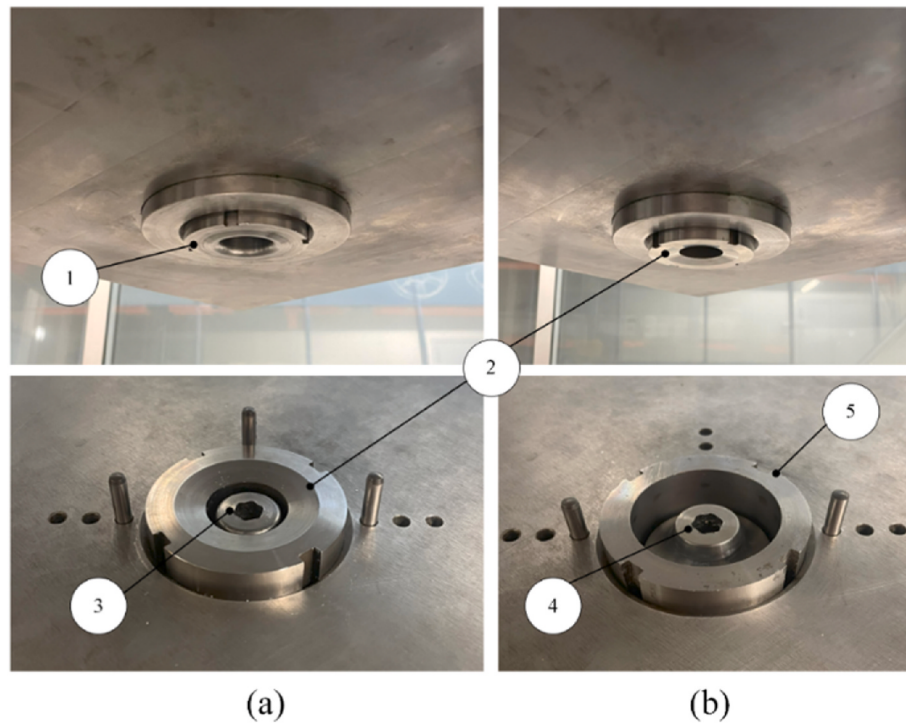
Active tool components for the (a) hole flanging stage and the (b) hemming stage: 1 - upper die, 2 - lower die, 3 - flanging punch, 4 - hemming punch, 5 - blank holder.
